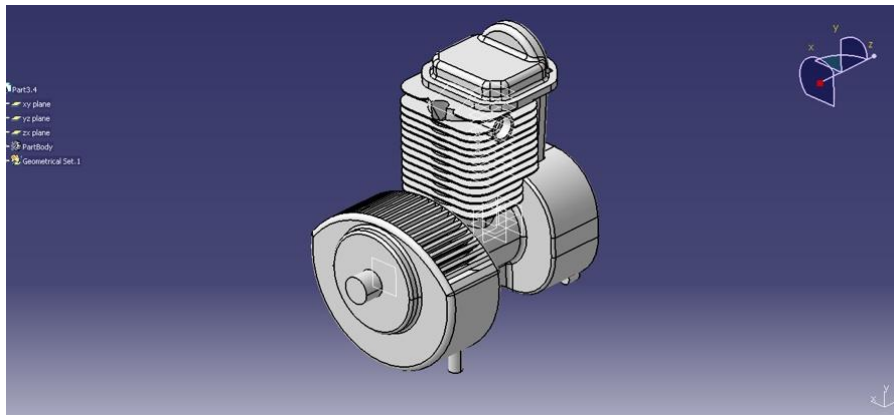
GX 35 engine after dismantling the exhaust, fuel tank and mounting
